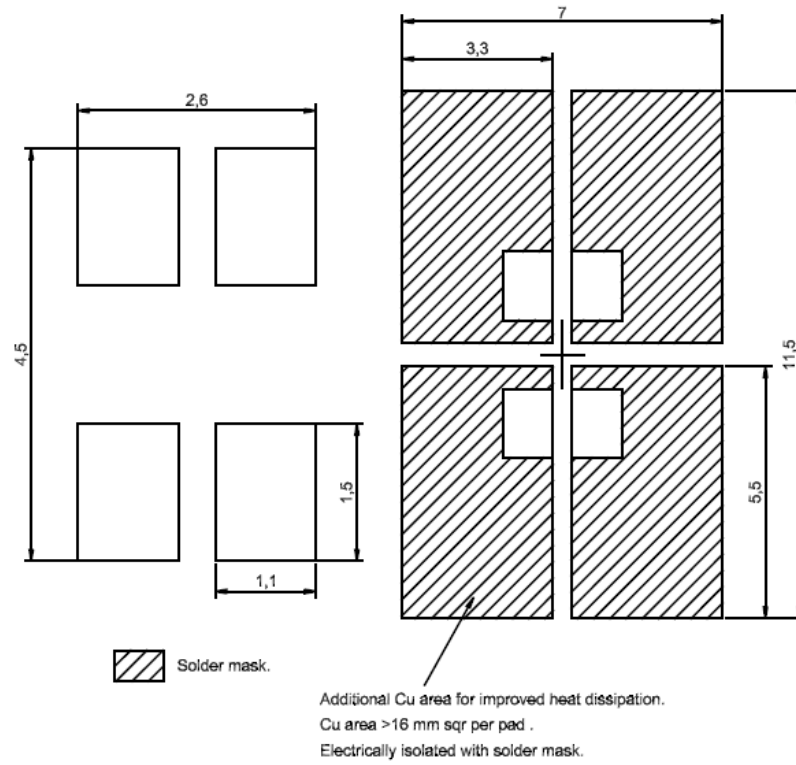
Recommended PCB solder pad layout for SignalSure 150 AM
